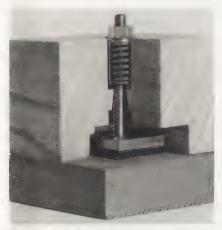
Clasping mechanism: detail of plate on rubber buffer surface.
